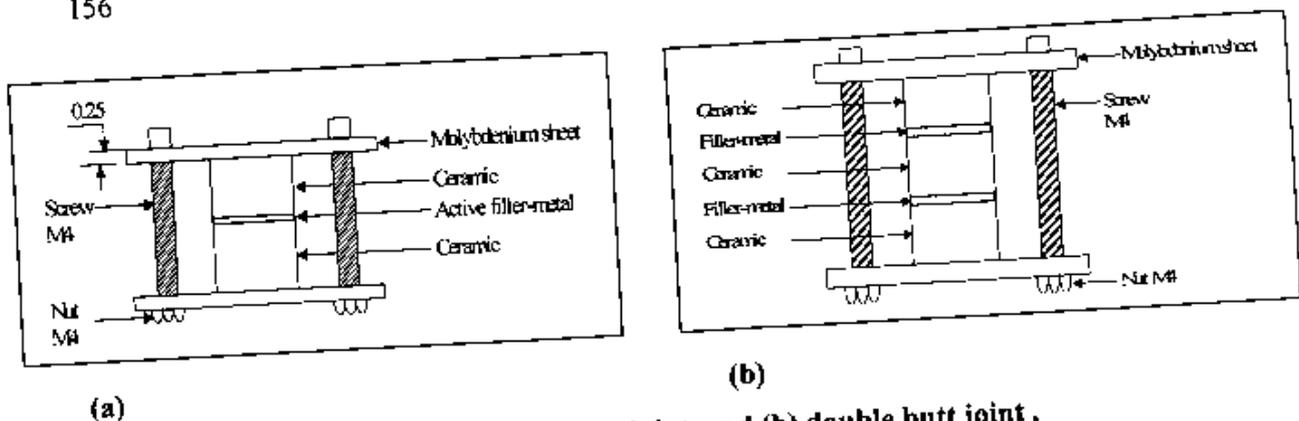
Fixtures for (a) single butt joint and (b) double butt joint .
